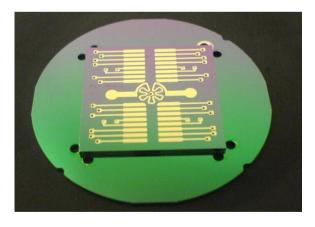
The MEMS thruster chip seen up-side down, manufactured using six fusion-bonded silicon chips. The metallic thin film pattern on the backside of the square four-wafer-stack valve package is the electrical interface to the connectors in the pod assembly. The square part is 22 by 22 mm (0.87"x0.87") and the diameter is 40 mm (1.57").
